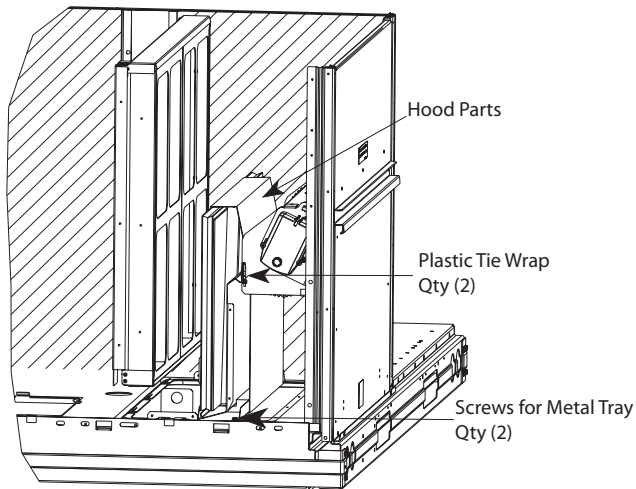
Economizer and Two-Position Damper Hood Parts Location
